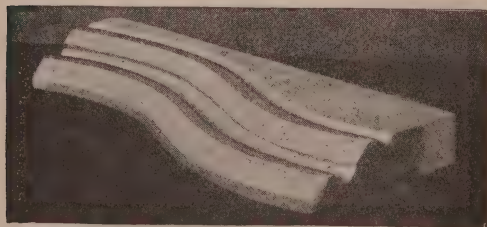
Corners Chamfered Off and Hollows Roughly Cut Out
